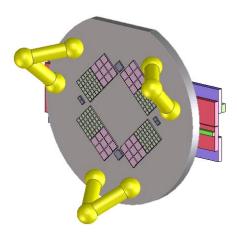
Concept of bi-pod mounts providing kinematic support of the cold plate from the telescope structure.
